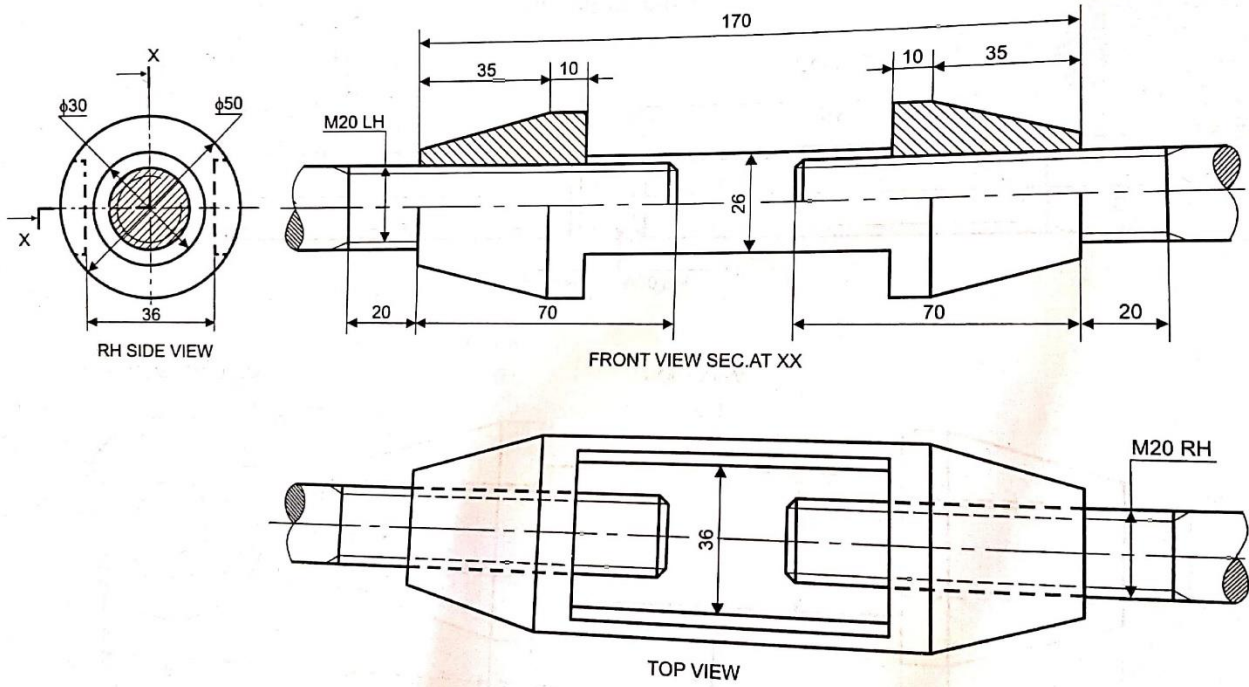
TURNBUCKLE (ASSEMBLY)
